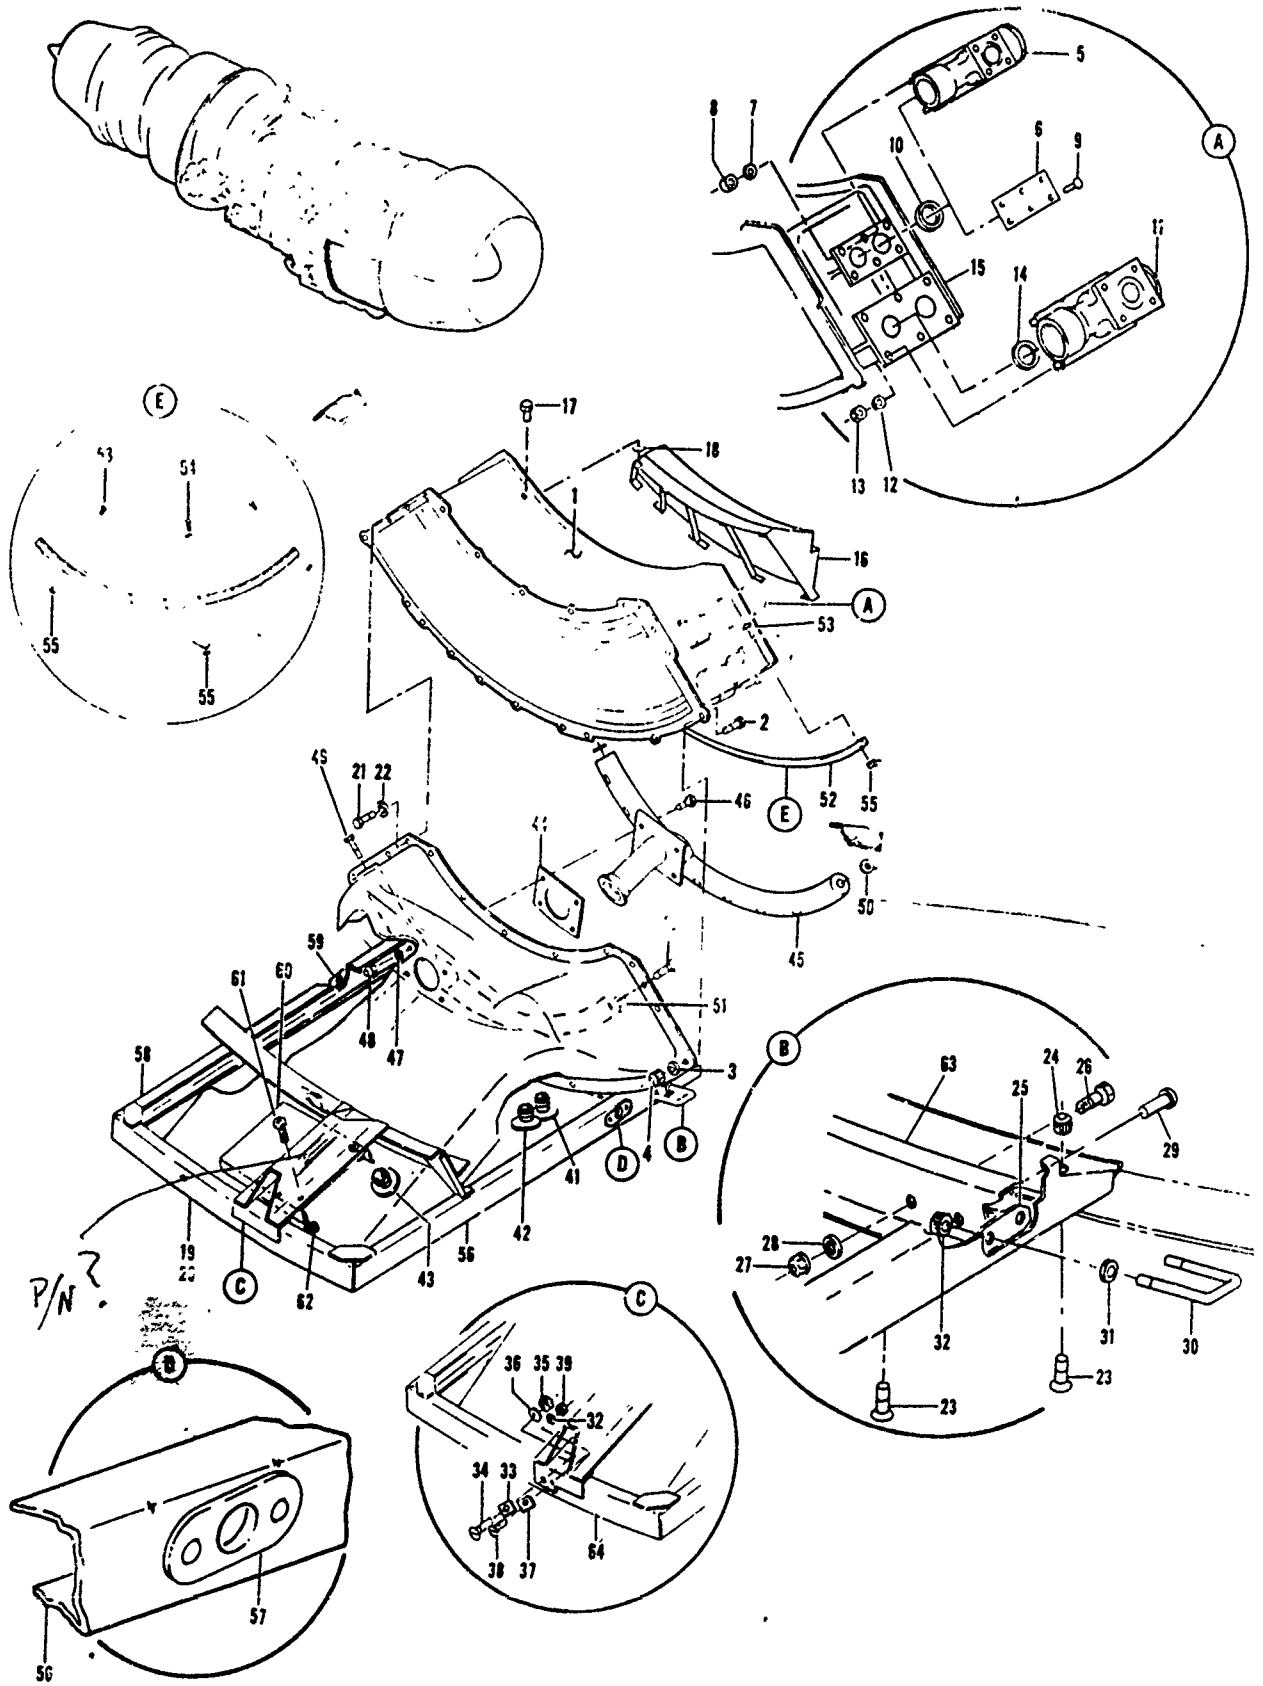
Engine and Generator Drive Oil Cooler Installation
